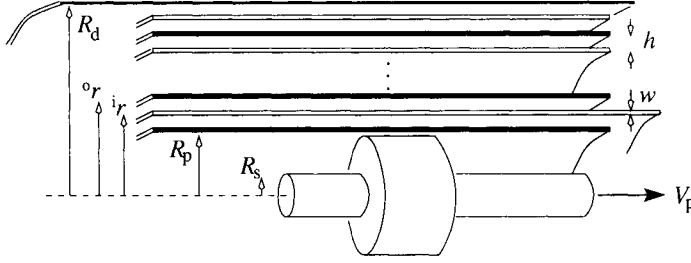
Arrangement of piston and ducts in the proposed ER damper design.
